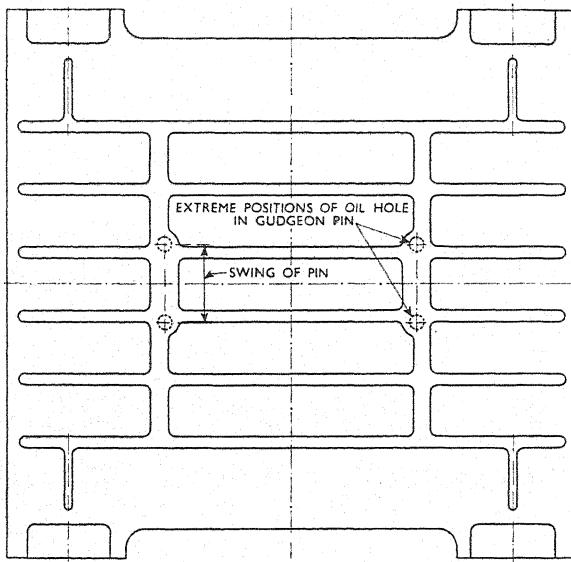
Developed View of Whitemetall Surface (Scott Engine)
